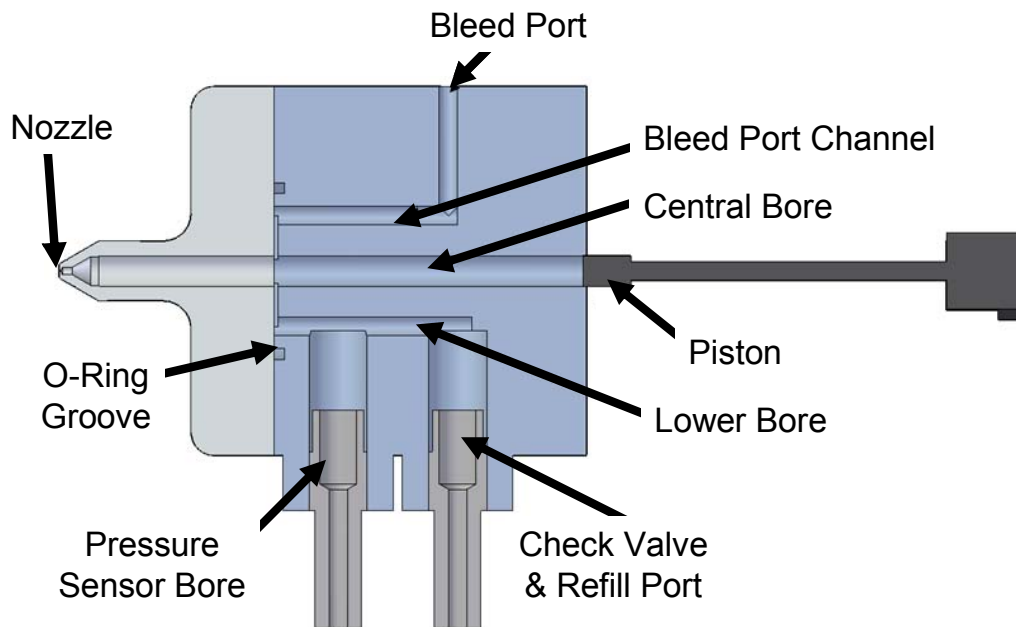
Cutaway CAD view of the drug cylinder and nozzle. Note the changed locations of the pressure sensor bore and bleed port channel. Also note the o-ring groove at the front of the cylinder.
